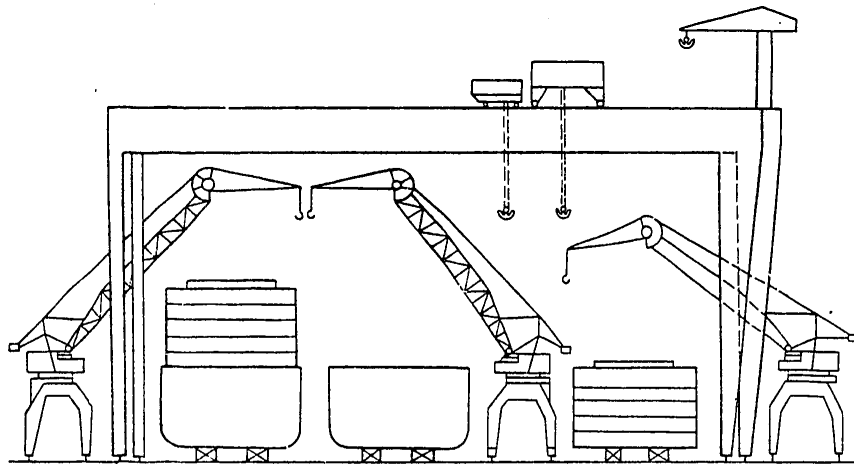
Section of uncovered horizontal shipbuilding ways with gantry and portal cranes
